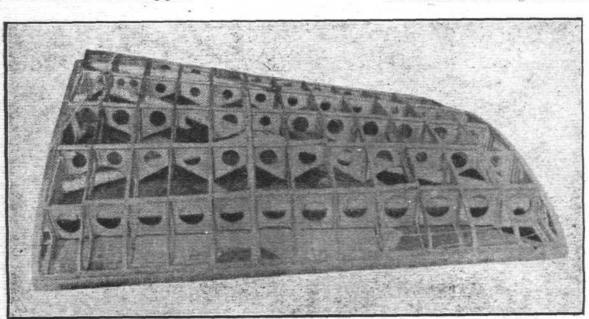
Centre section of lower main plane with three-ply surfacing removed.
